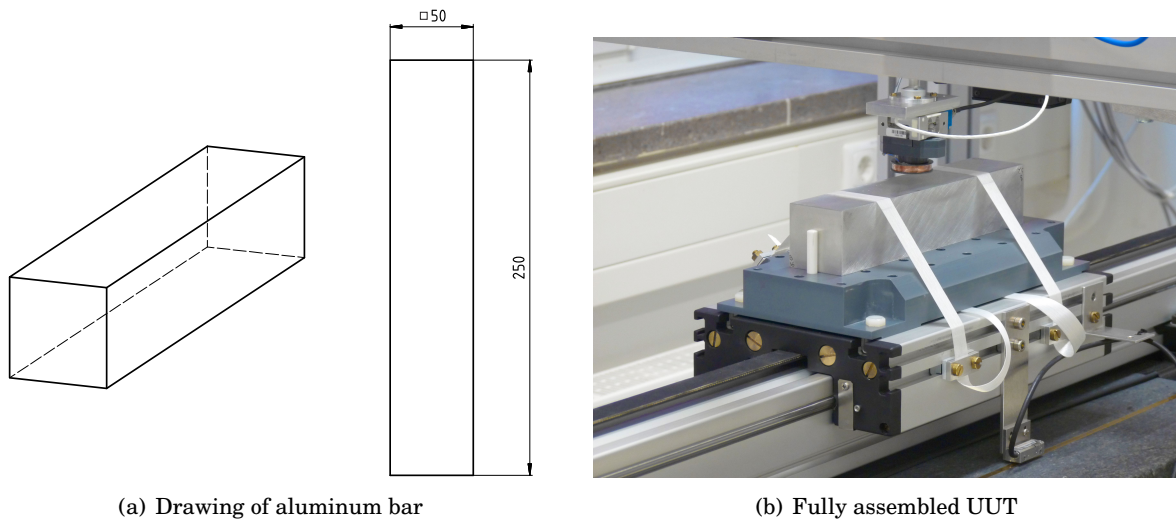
Technical drawing (a) and a photograph (b) of the aluminum bar mounted on the slide of the linear drive.
